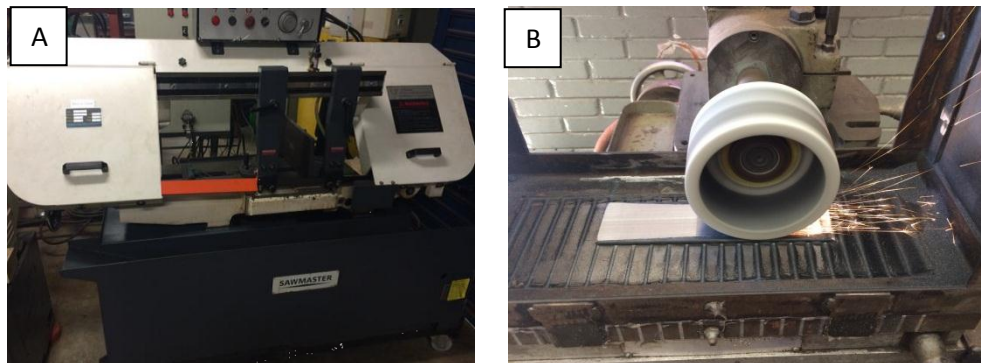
A) horizontal bandsaw machine B) surface grinder machine
